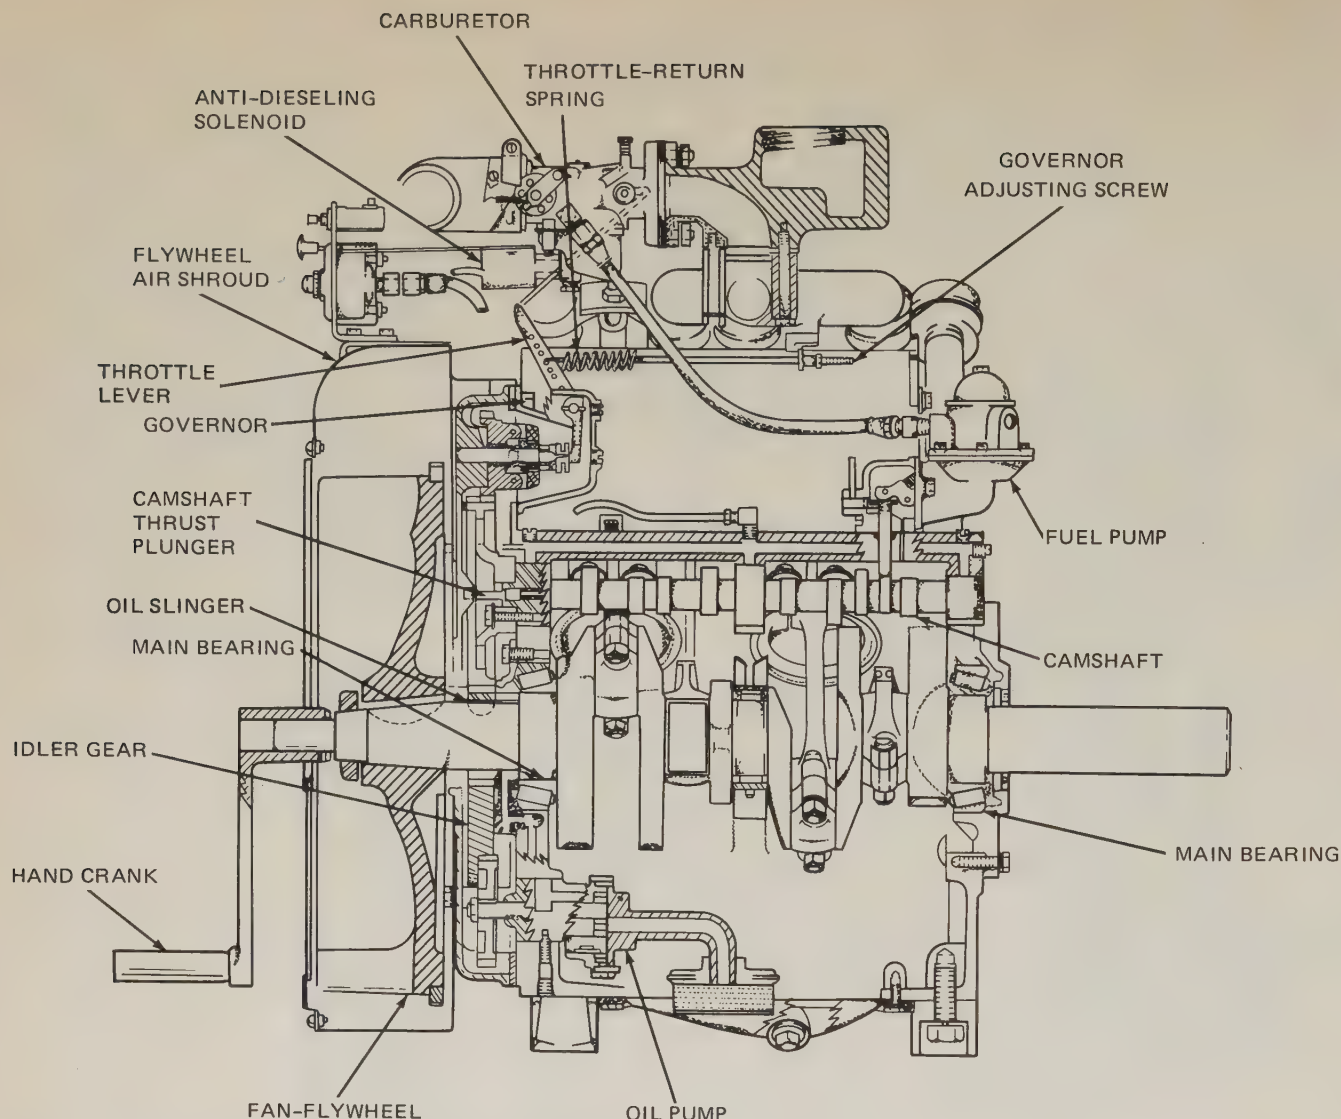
An air-cooled V-4 type of four-cycle engine (left) in side sectional view, and (right, next page) in end sectional view. (Teledyne Wisconsin Motor)
